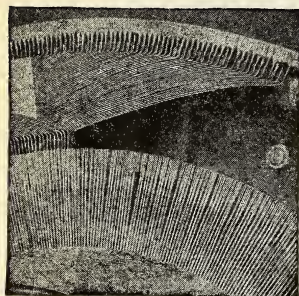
Involute equalizing commutator risers. One layer of risers has been partly cut away. Courtesy of the General Electric Co.
